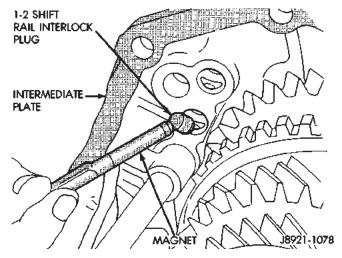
Remove 1–2 Shift Rail Interlock Plug
